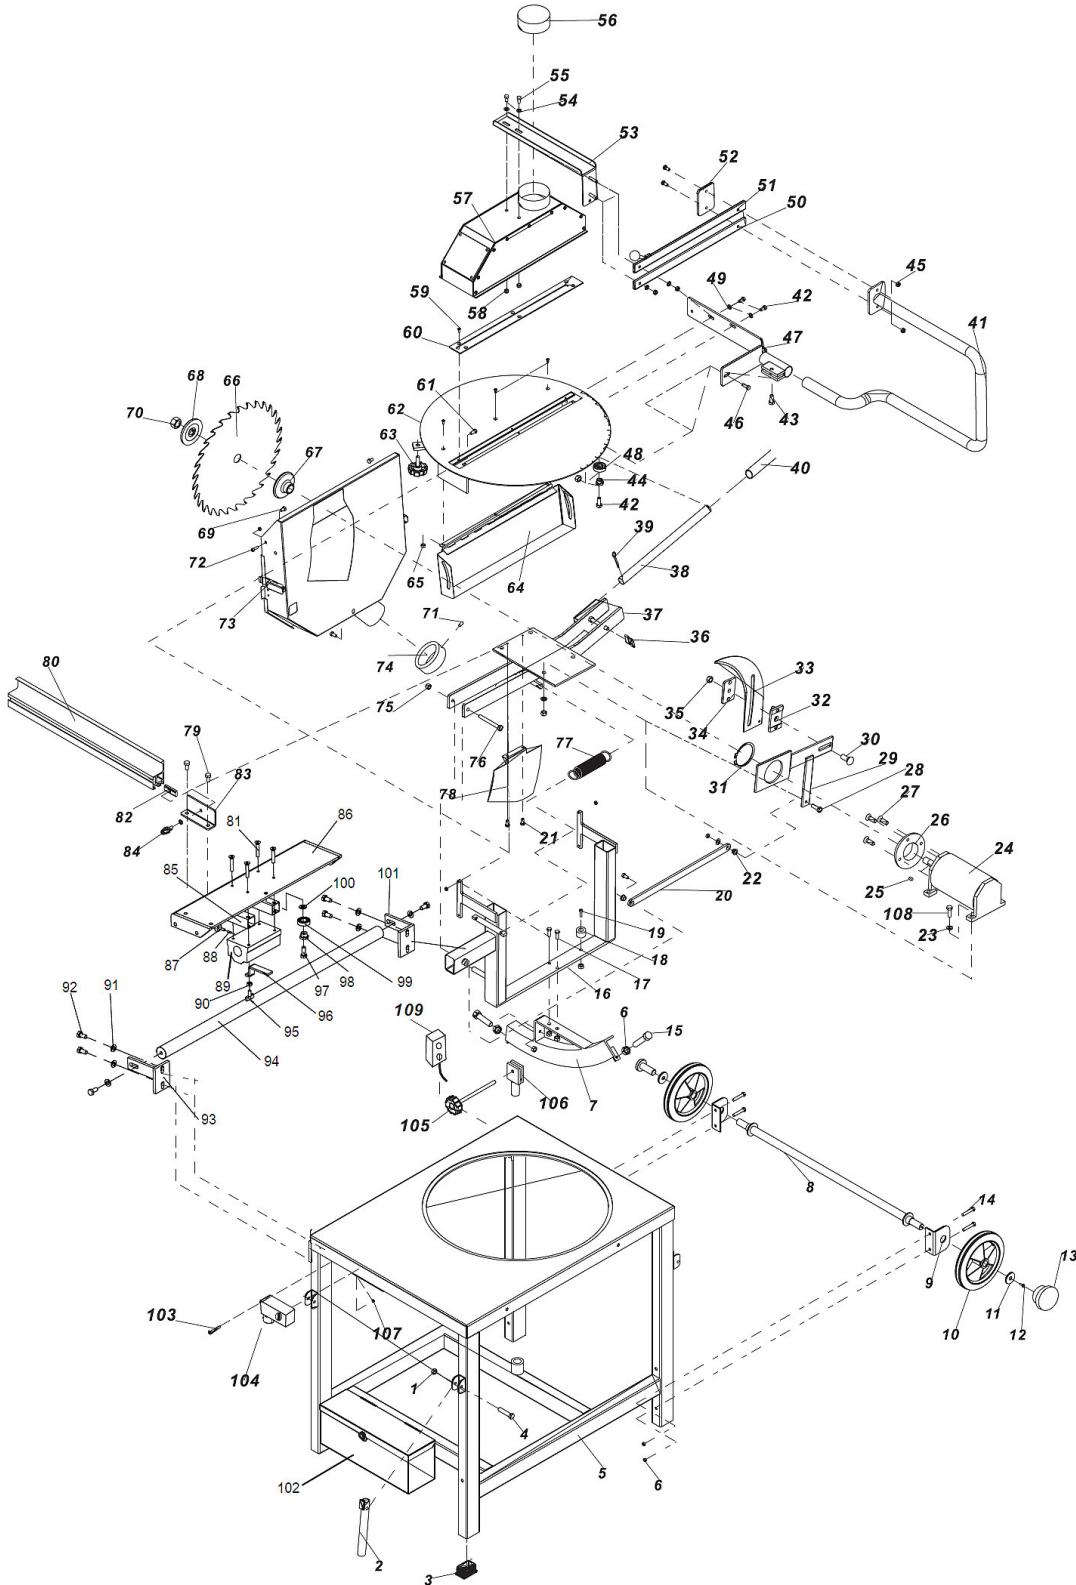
Spare parts drawing 1 Circular saw TKS-Z 400
